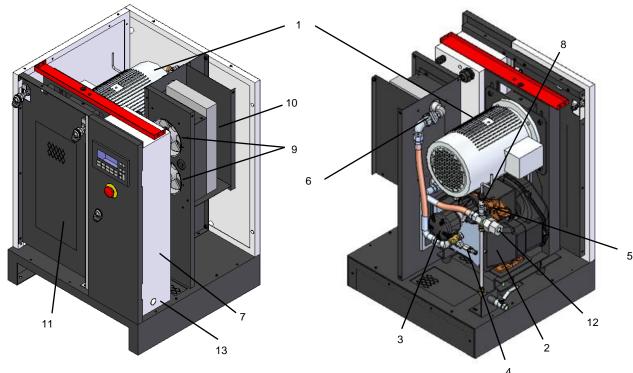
Overview of the assemblies: Oil-free scroll compressor 3.7 kW
